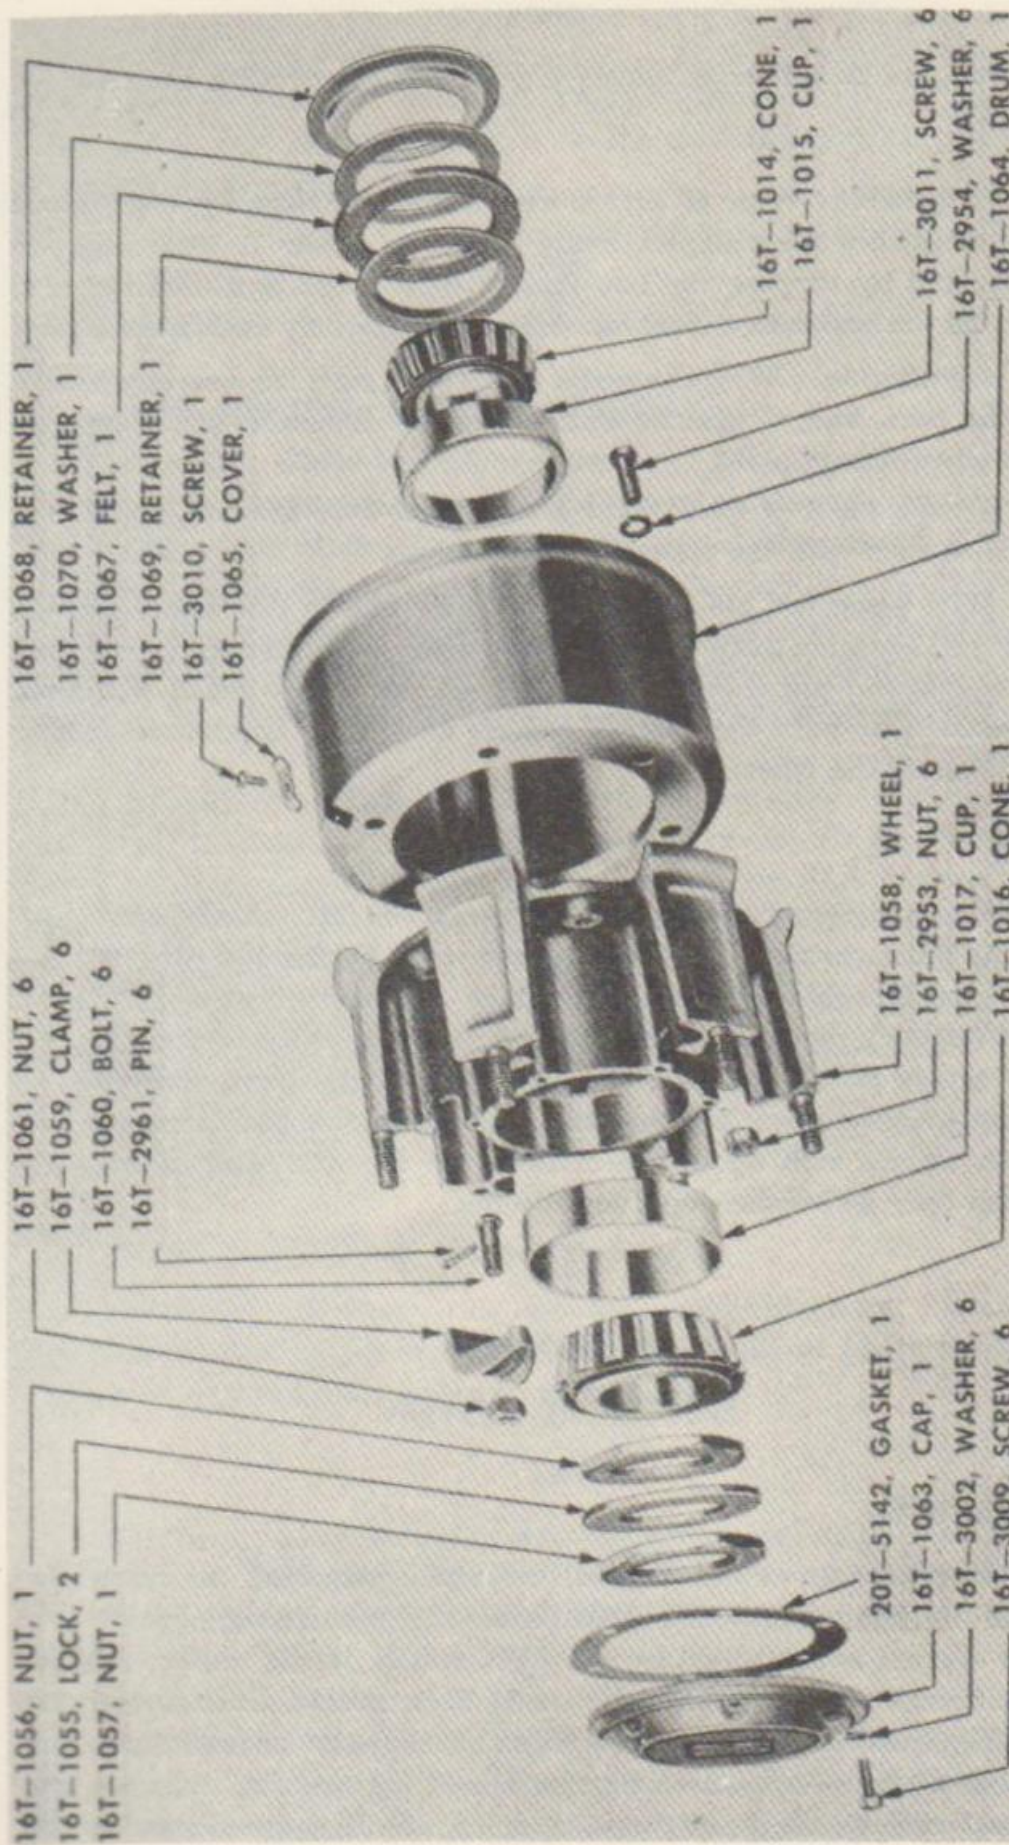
SEMITRAILER WHEEL AND DRUM ASSEMBLY—EXPLODED VIEW
